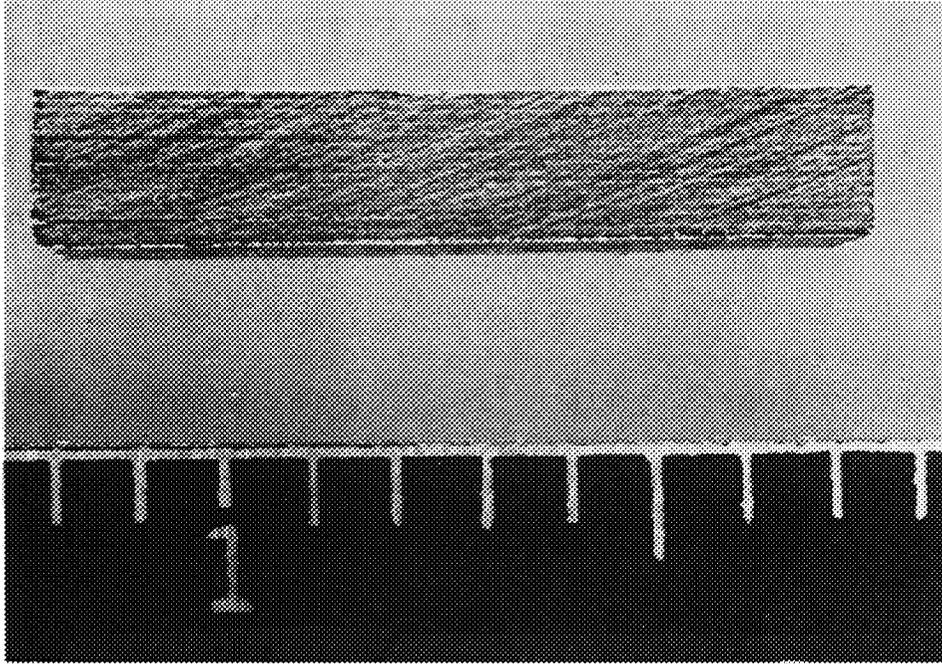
PHOTOGRAPH OF A STATIC TESTED INTERLAMINAR SHEAR TEST SPECIMEN, TYPICAL OF THOSE REMOVED FROM EACH TAIL ROTOR SPAR FOR COUPON TESTING
